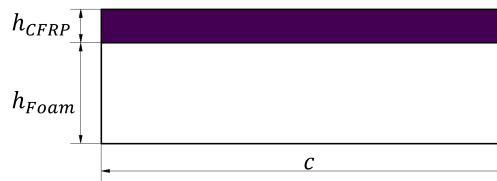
Cross-section of the beam. The dimensions of the cross-section are not-scaled.
